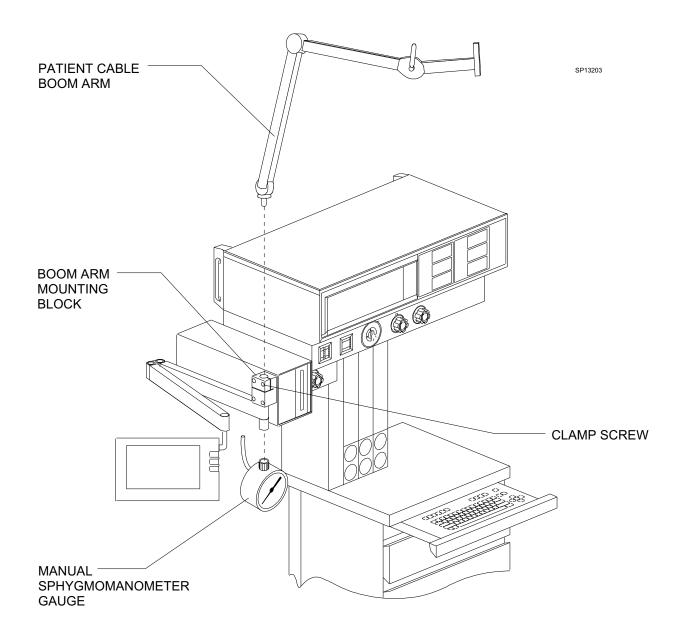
SPHYGMOMANOMETER GAUGE AND UPPER BOOM ARM REMOVAL
